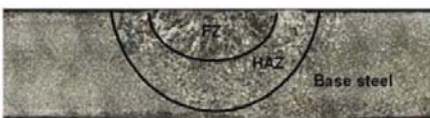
The macrostructure of steel weld with electrical current of 45 ampere current and 0.65m/min of welding speed.
